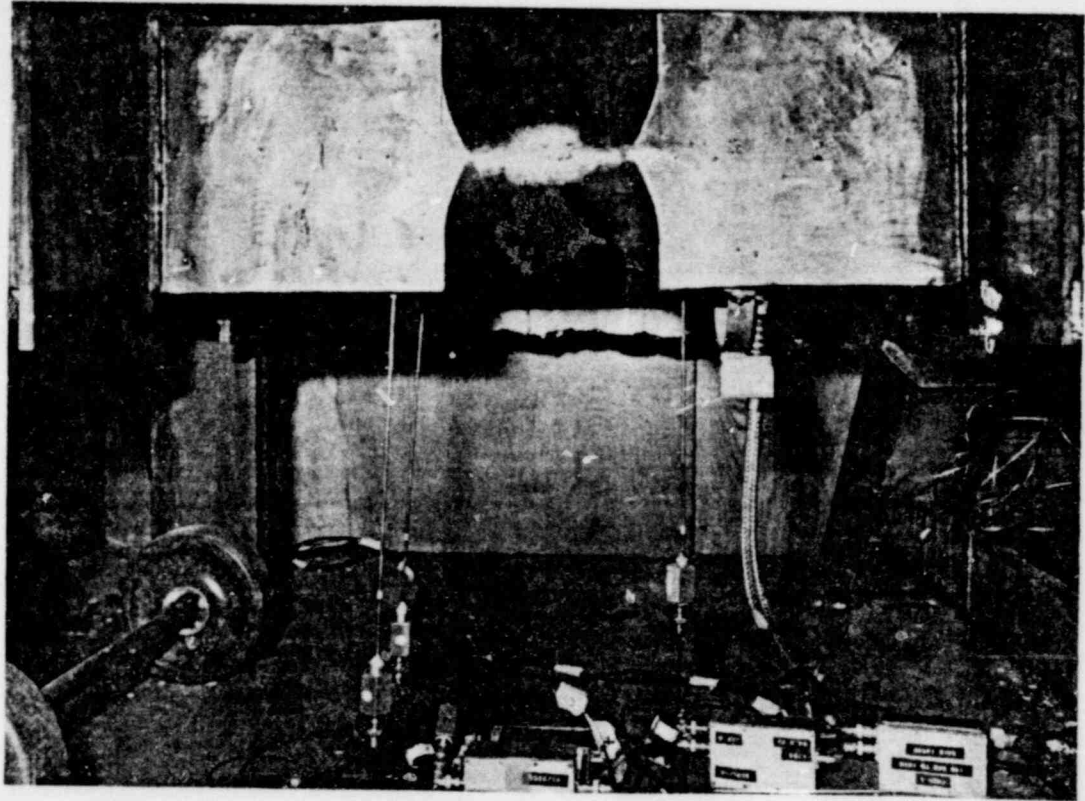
Photograph of the Pipe Bend Test Specimen.
